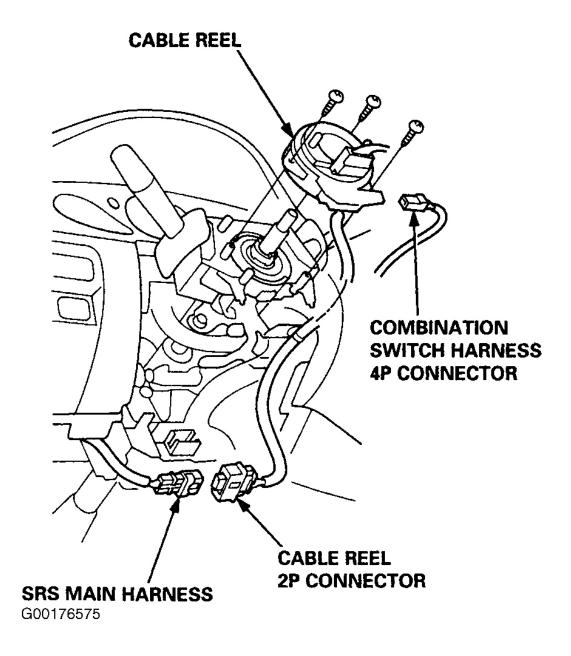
Removing Cable Reel From Steering Column (3.5RL) Courtesy of AMERICAN HONDA MOTOR CO., INC.
